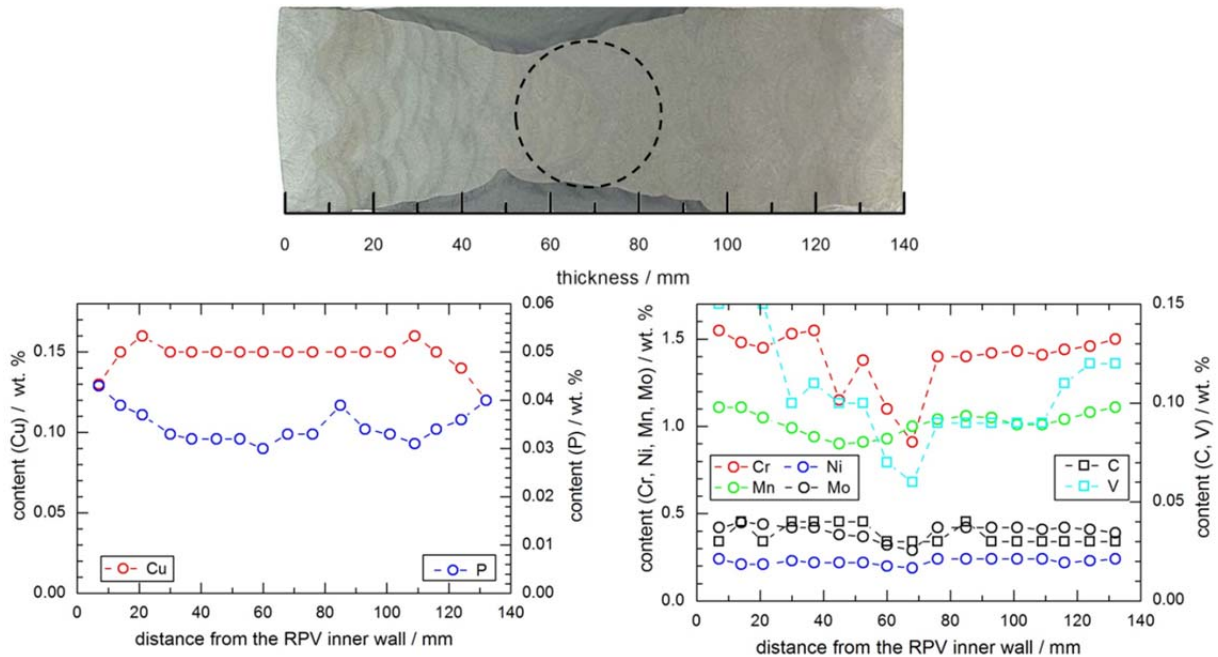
Metallographic section and chemical composition of the multilayer welding seam from the uncladded Unit 1 RPV [Valo-2011].
